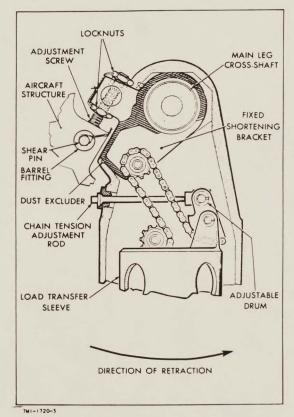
CHAIN AND SPROCKET ASSEMBLY
